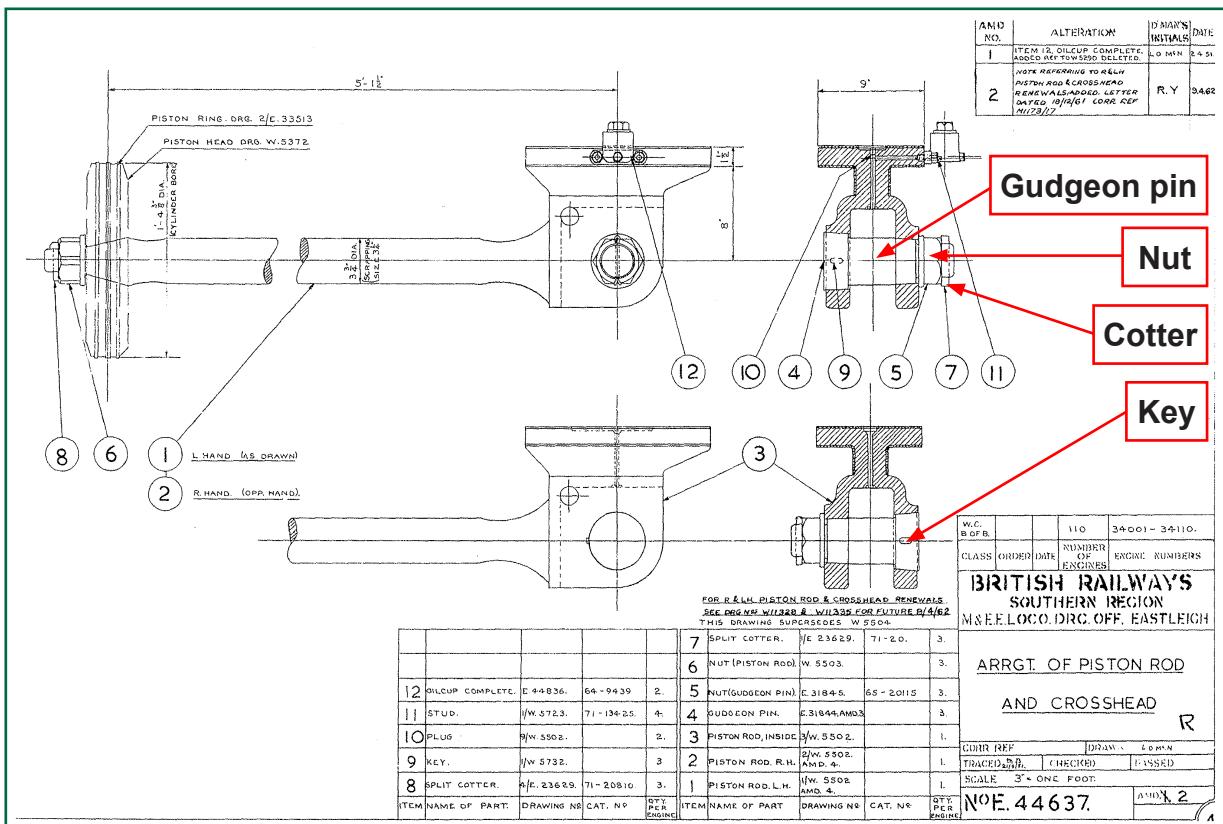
Crosshead and piston assembly (British Railways (Eastleigh) drawing E44637). Drawing reproduced by courtesy of the National Railway Museum/Science & Society Picture Library
